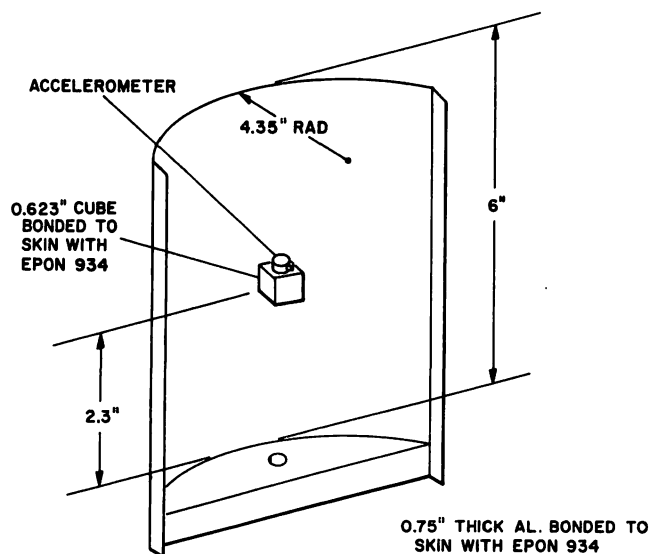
Test Specimen - Cantilever on Skin Panel.
